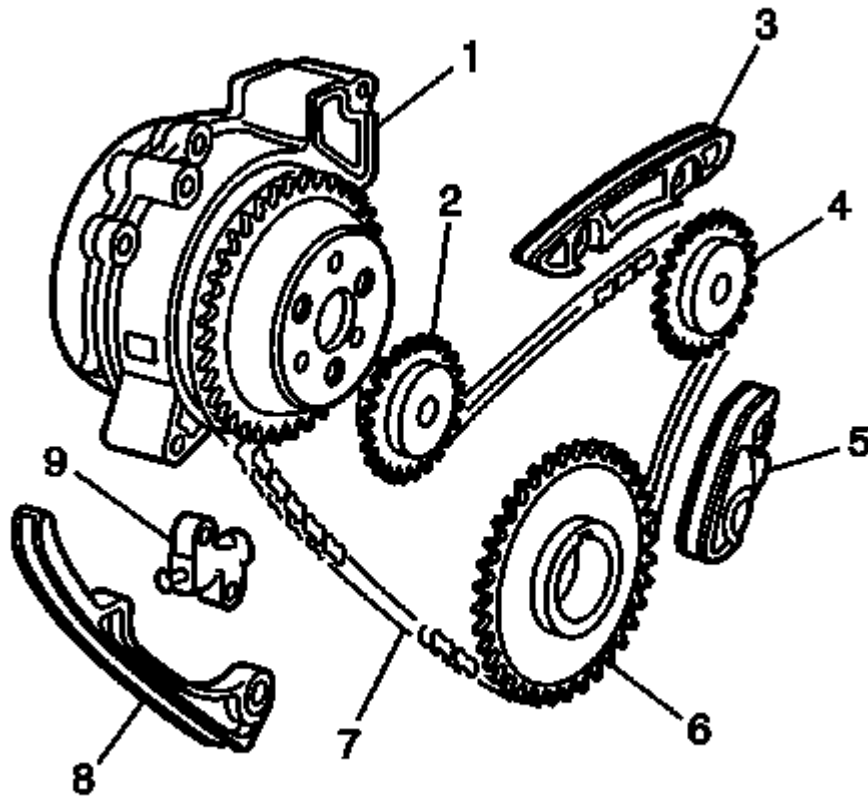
Water Pump, Balance Shaft Chain And Sprocket
